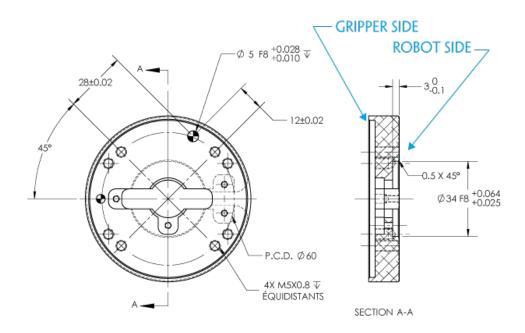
Coupling for PCD 60 mm with 4 x M5 clearance.
